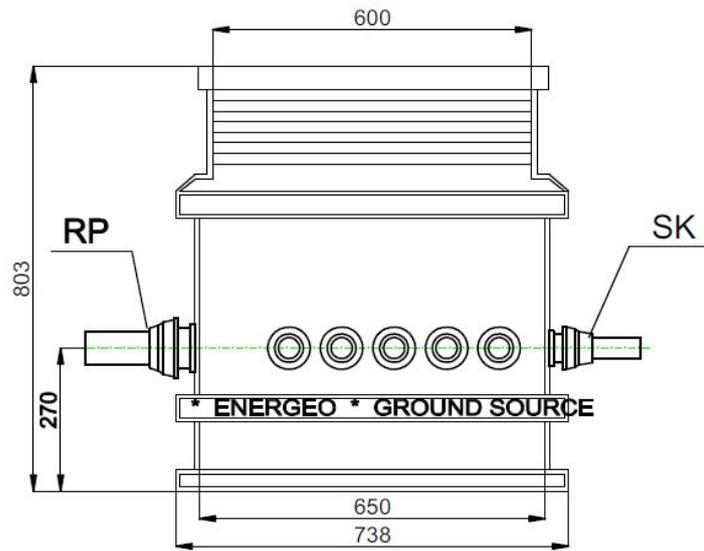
New BRADO-R. 4-section Distribution Well .Cross-section.
